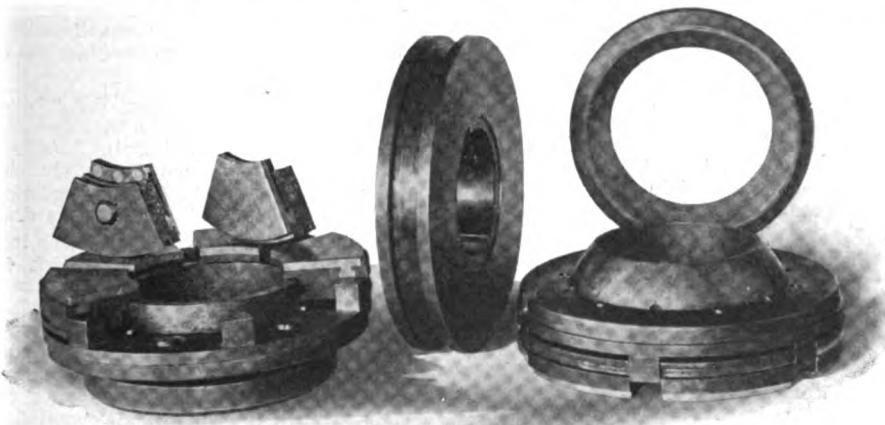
Double Horizontal Thrust Bearing. Leveling Washer Type
